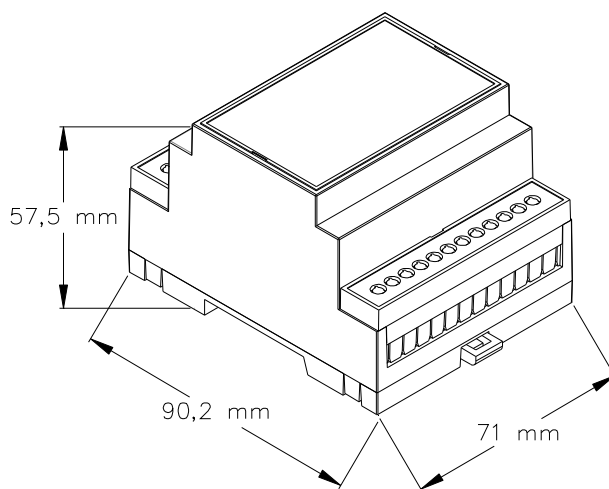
TCS xxxC dimensions (ABB Combiflex® HX1)
